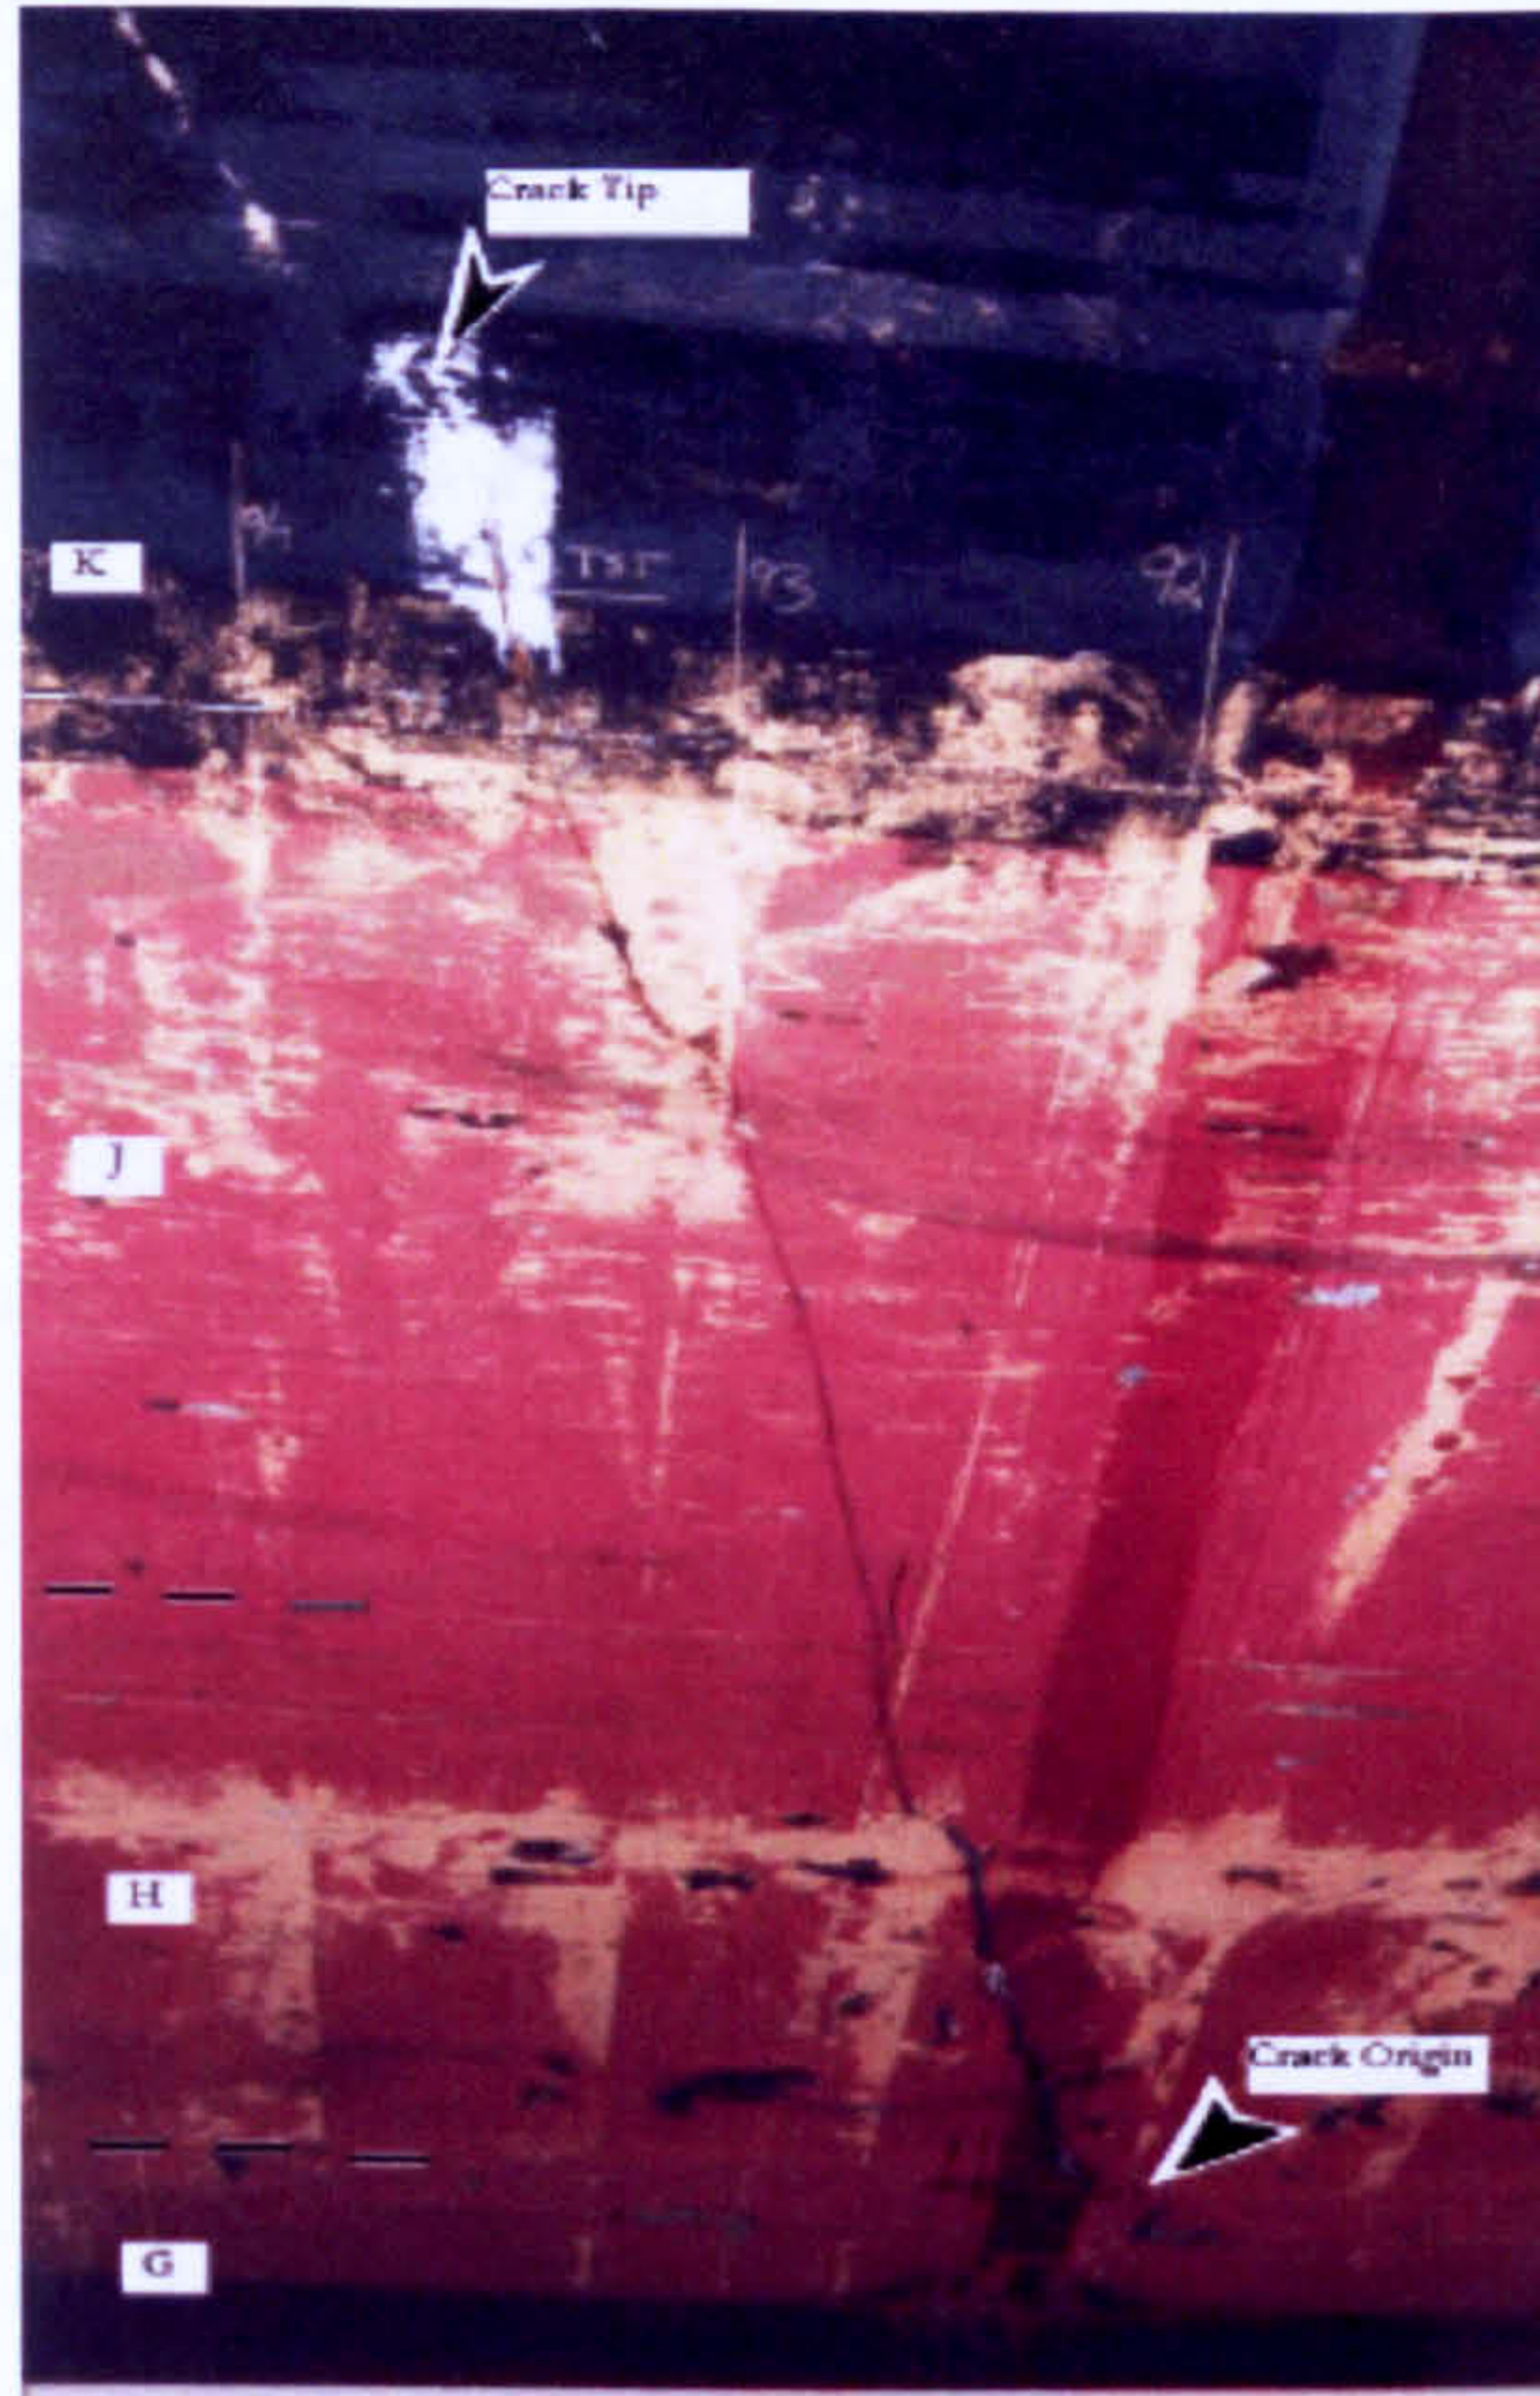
Brittle fracture in sideshell of Lake Carling
